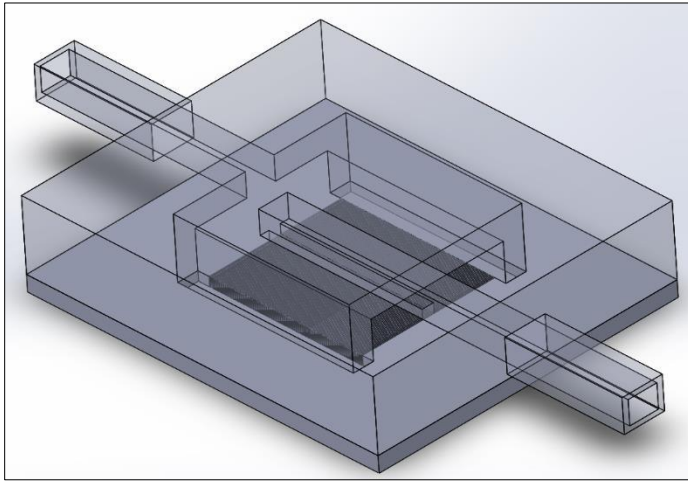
DETAILED CAD MODEL COLD PLATE GEOMETRY
